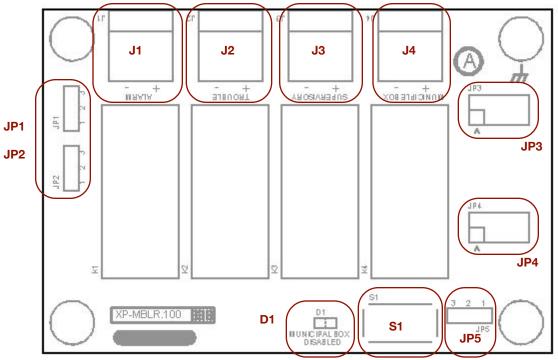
Line Reversal / Masterbox Board Layout Details
